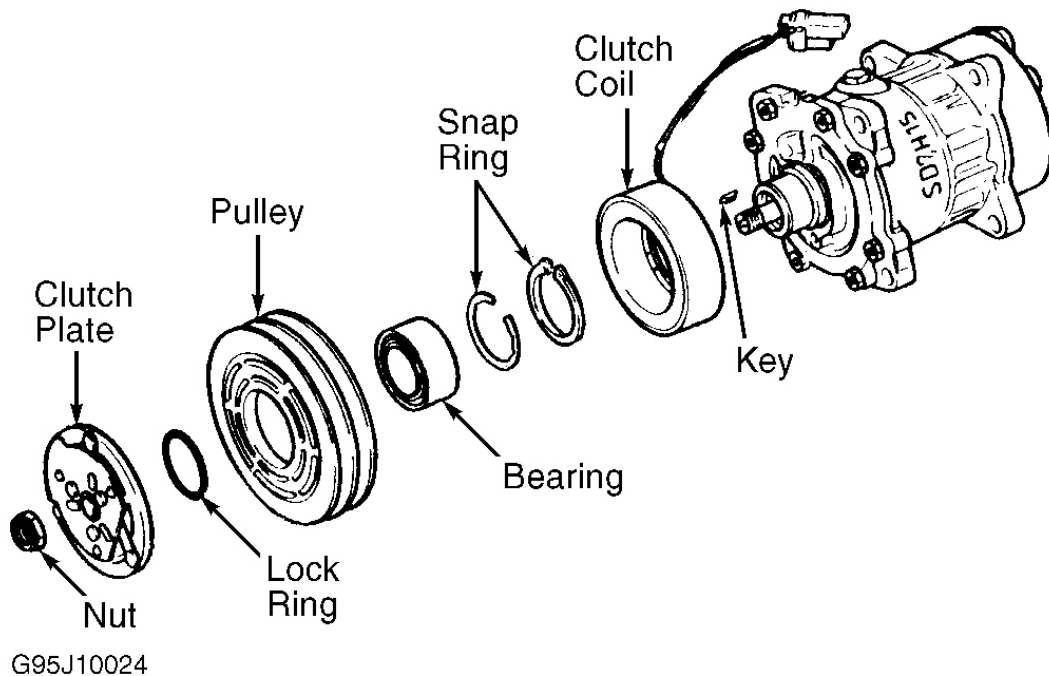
Exploded View Of Compressor (Sanden 7-Cyl.)
